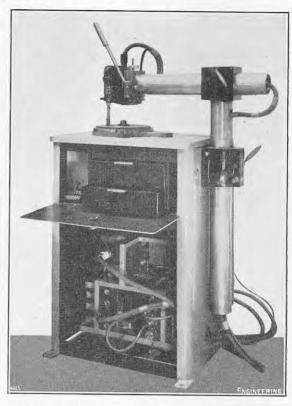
Stud-Welding Machine; Cyc-Arc, LIMITED
